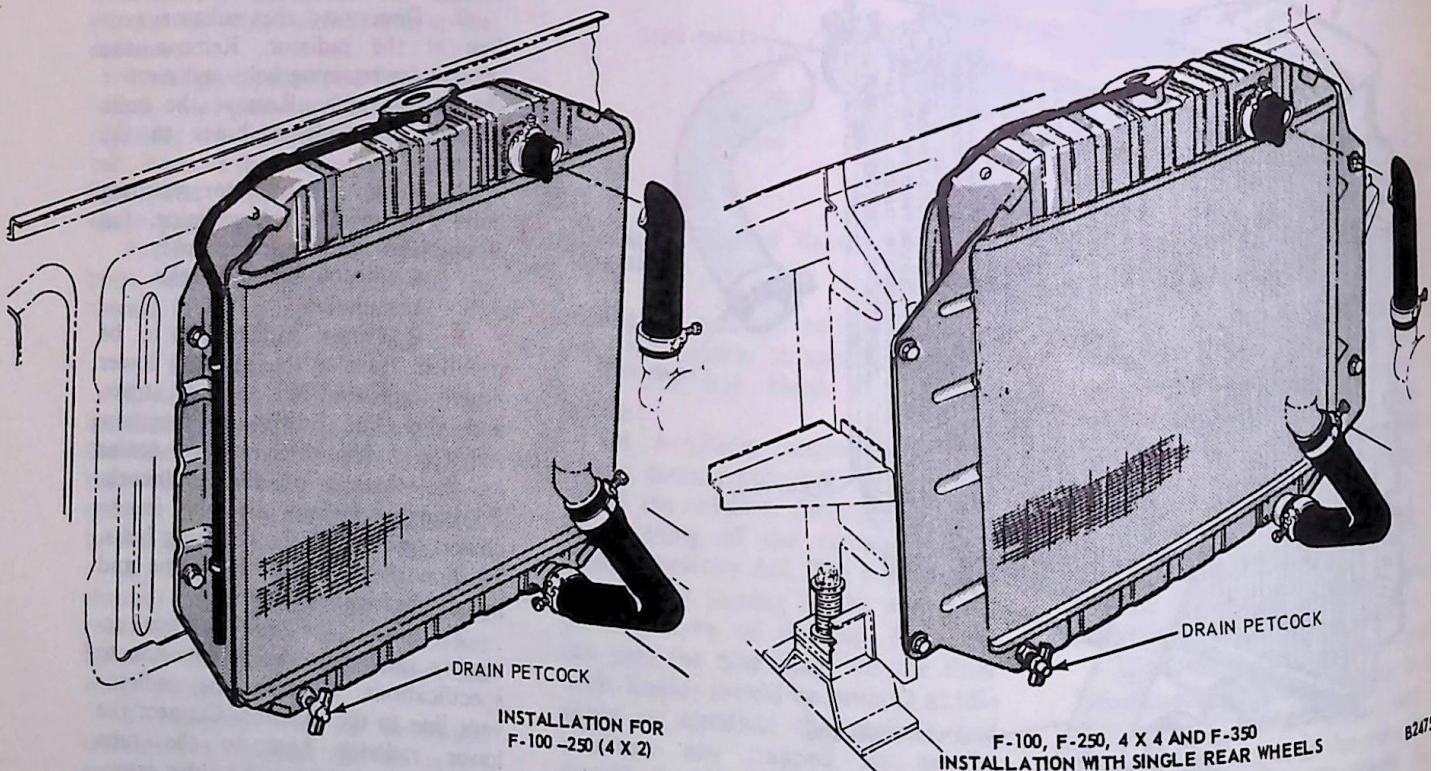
Typical F-100-350 Radiator Installation—240-300 Six Gasoline Engines
